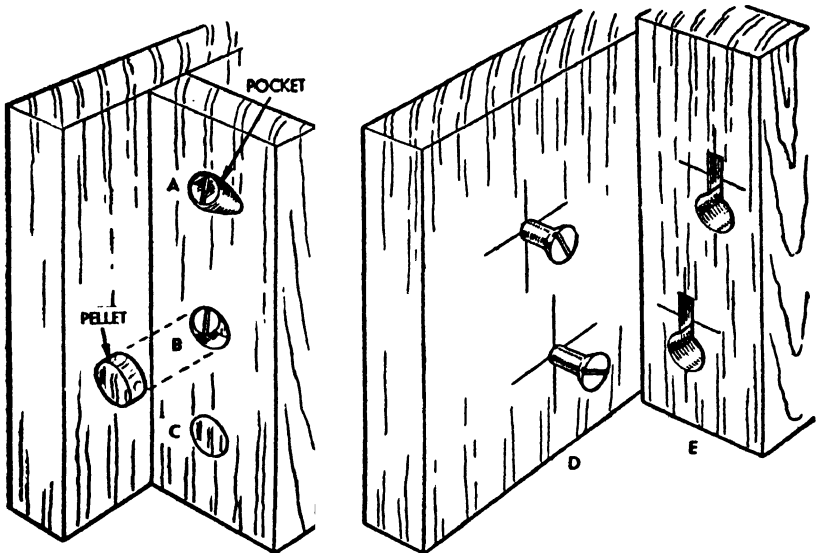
Methods of screwing. A. Pocket screwing; B. hole drilled to take head of screw; C. hole plugged with circular pellet; D and E. secret or slot screwing.
